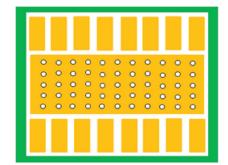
PCB Exposed Pad Land Pattern Segmented by Copper Defined Pads
